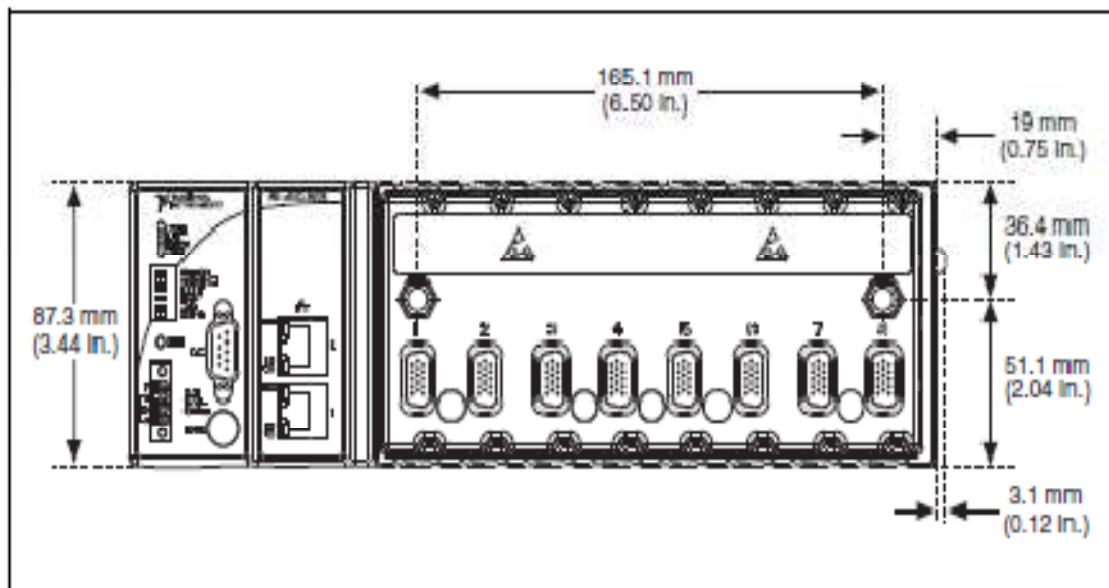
cRIO-9072/3/4, Front View with Dimensions
